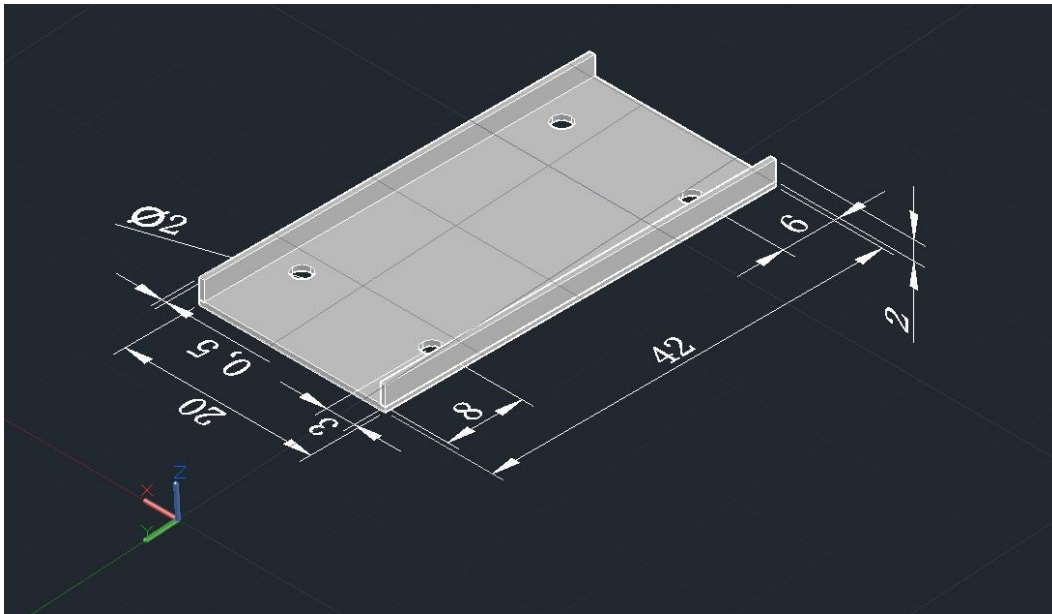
Dimensions of the bottom plate of phantom holder. The plate is made of plexiglass.
